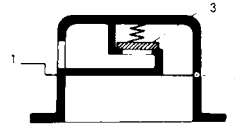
Gauge hatch closed by mechanical breathing valve
